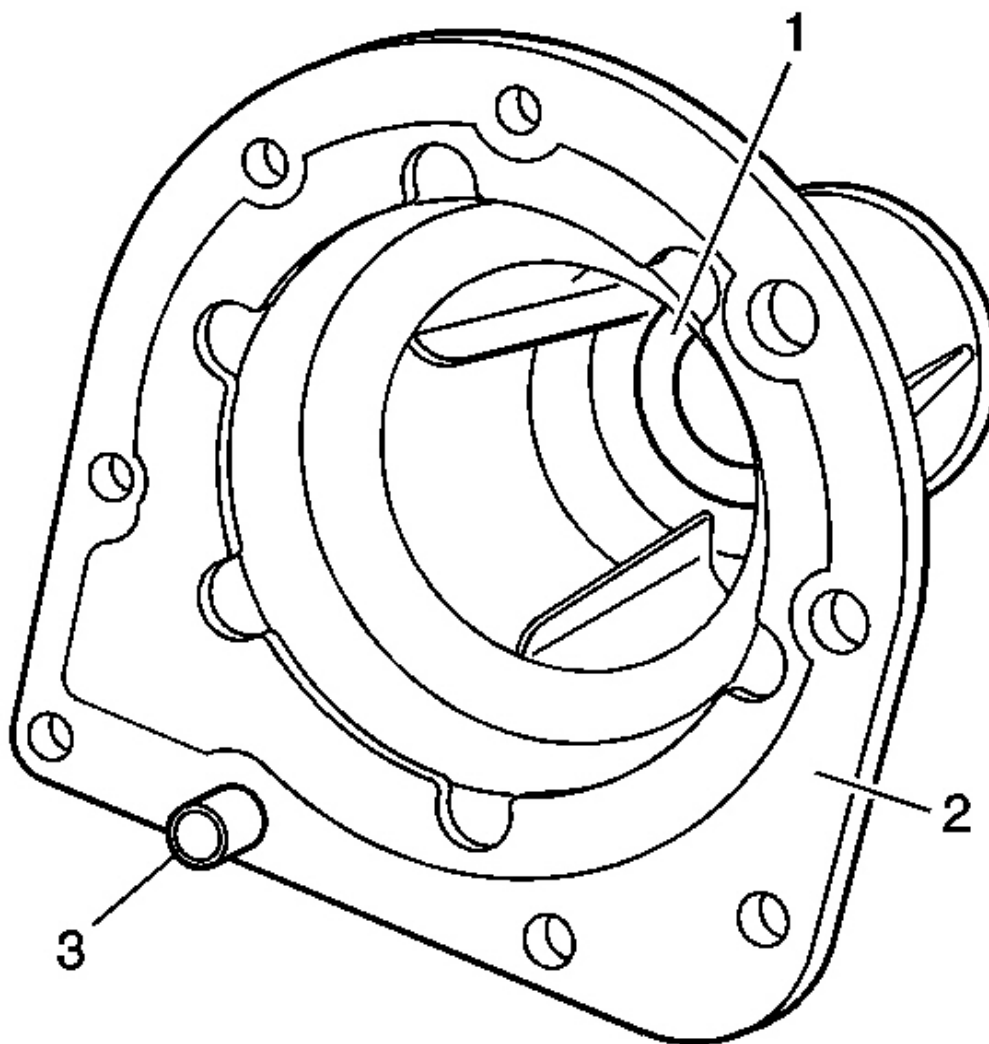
Oil Pump Suction Pipe And The Oil Pump Suction Hose
